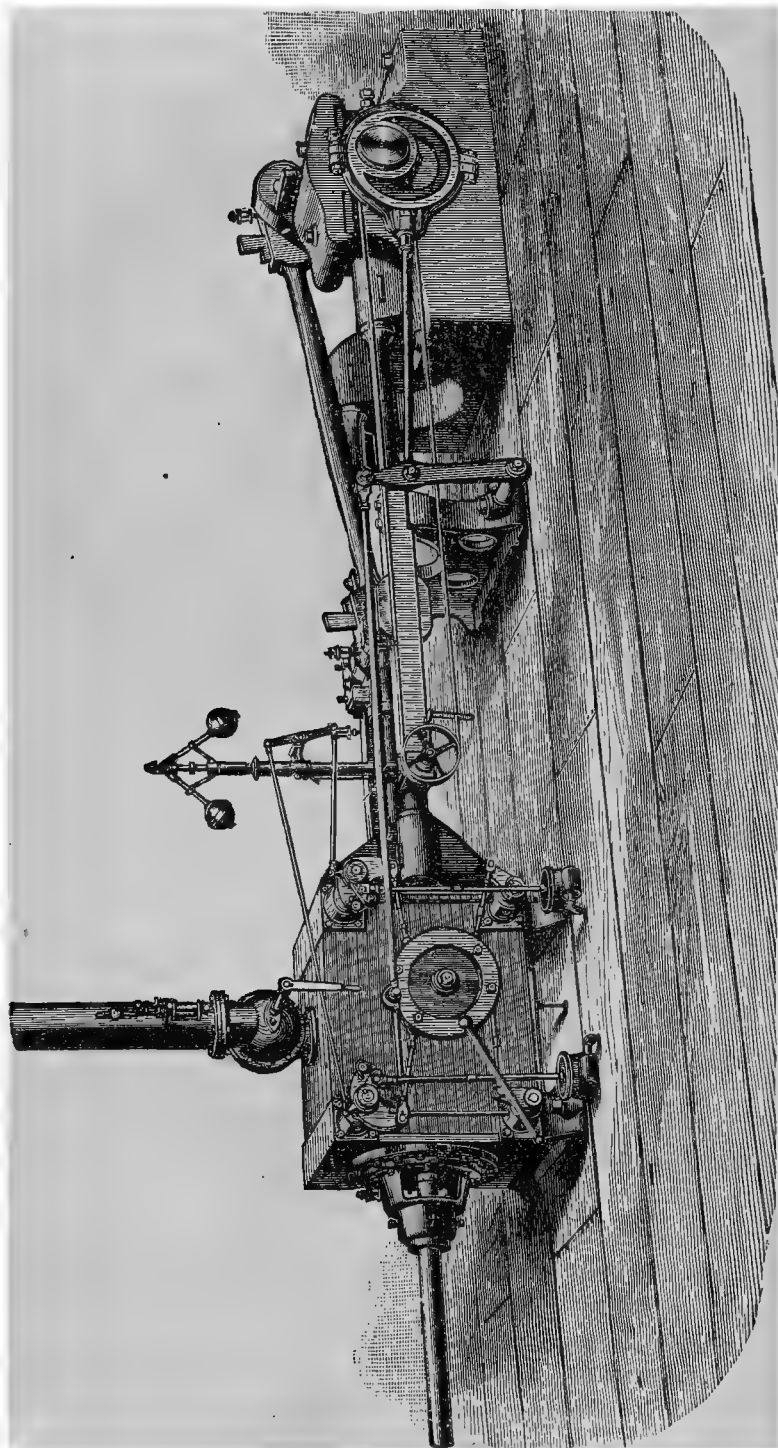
CORLISS ENGINE, WITH EXTENSION-ROD.
